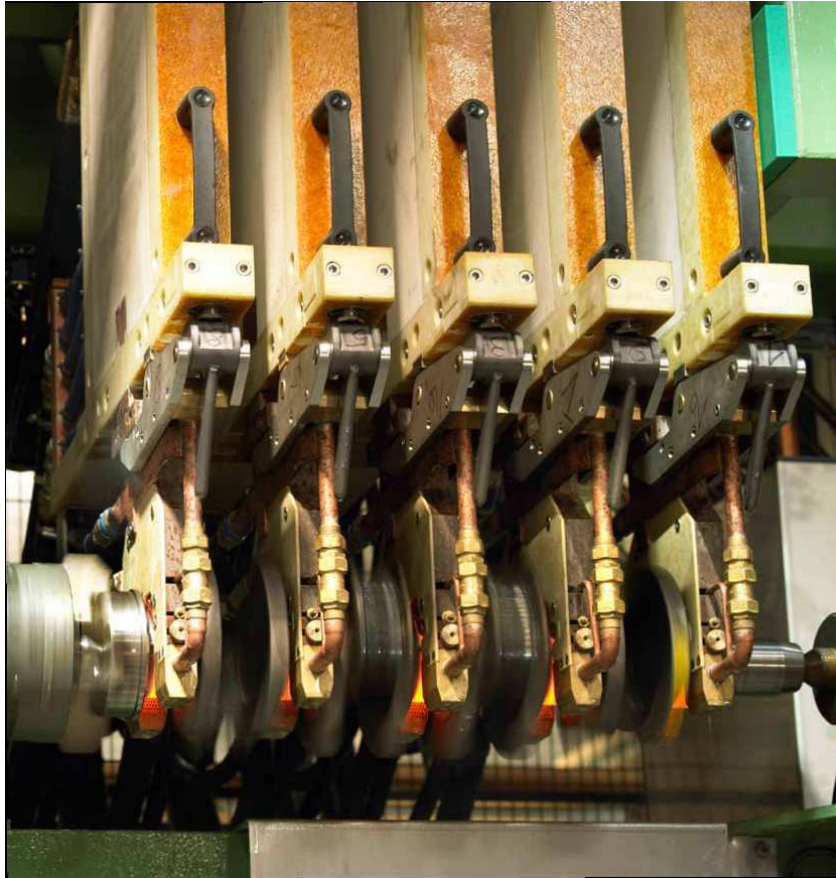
Induction heating of a crankshaft 1 (Image provided courtesy of EFD)
